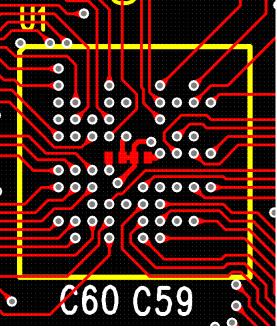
Power Layer 157-Ball BGA Escape Routing Figure 14. Bottom Layer 157-Ball BGA Escape Routing
